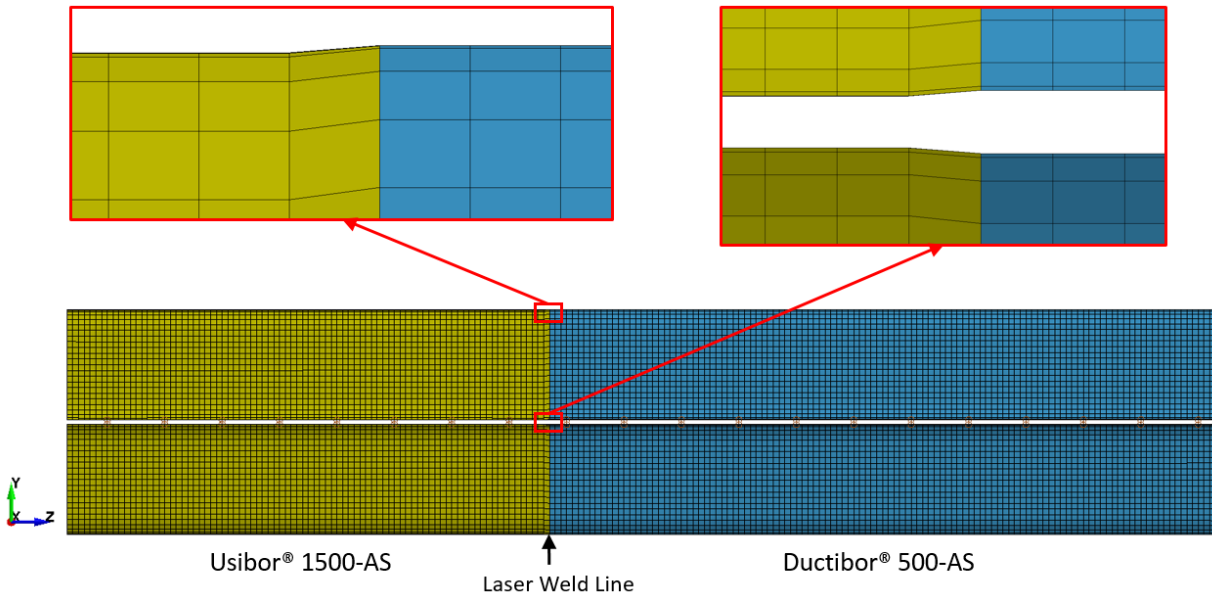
Weld line transition in multi-gauge TWBs.
